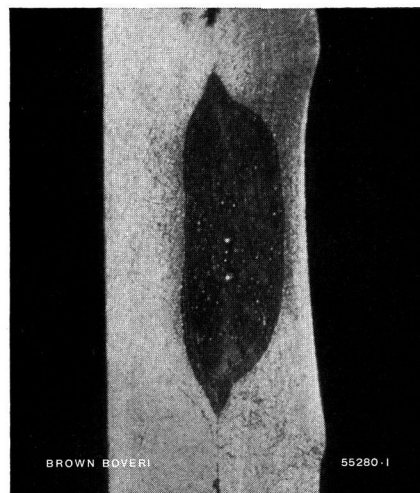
Ground section through spot weld of two 1 mm aluminium sheets.
